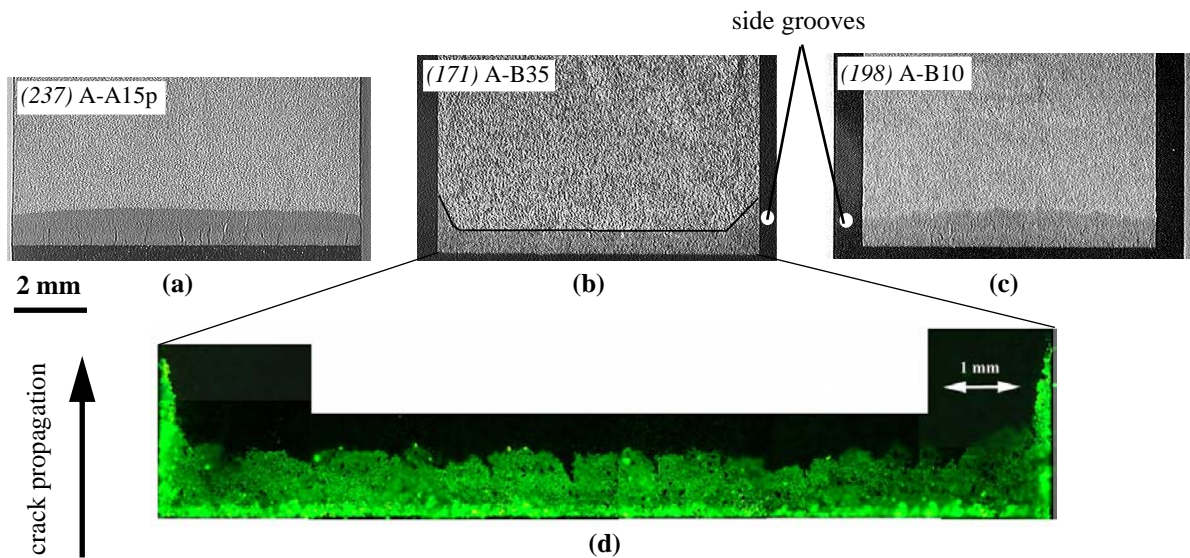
Binocular fractographic micrographs, illustrating the effect of side-grooves. (a): flat surface specimen; (b): side-grooved specimen, with the pre-crack front marked by a drawn line, (c): specimen side-grooved after pre-cracking; (d): same specimen as (b), the crack front is revealed under optical microscopy and UV light using the fluorescent penetrant introduced after pre-cracking. See also Figures 4-12 and 4-15 for visualization of crack fronts after ductile crack propagation.
